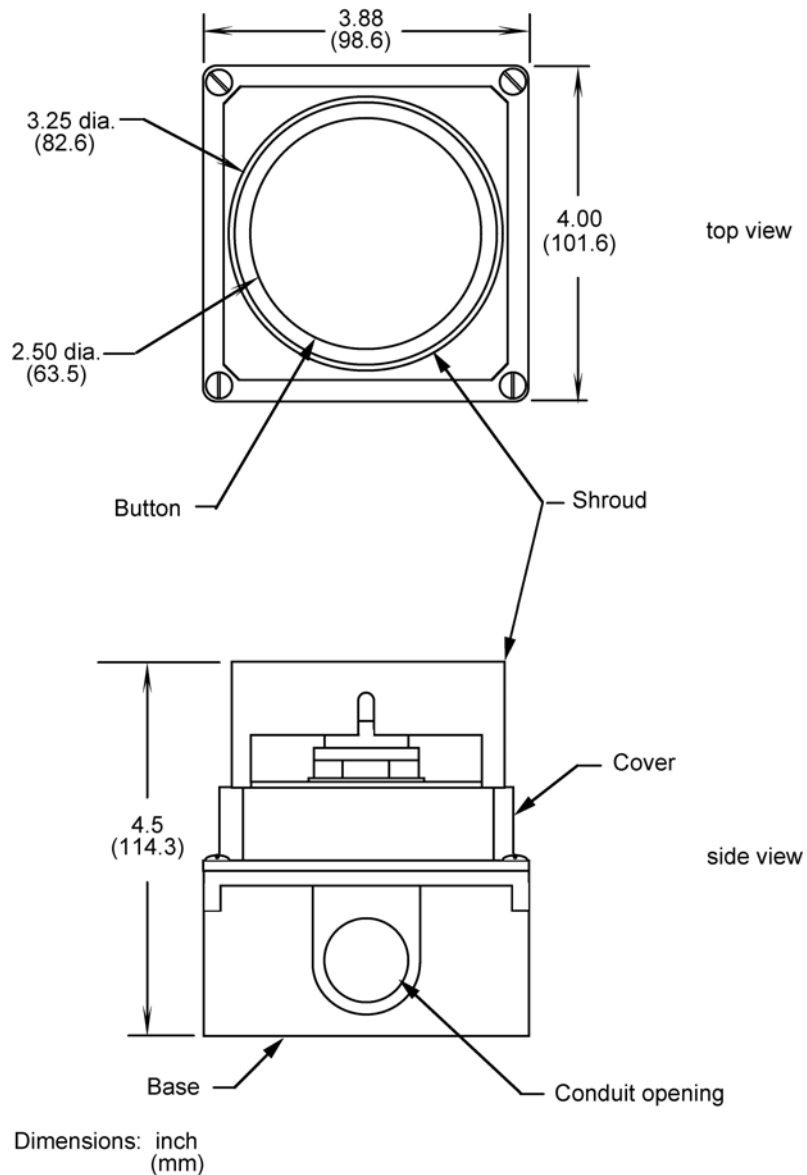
One-hand Control Switch: Mounting Dimensions
